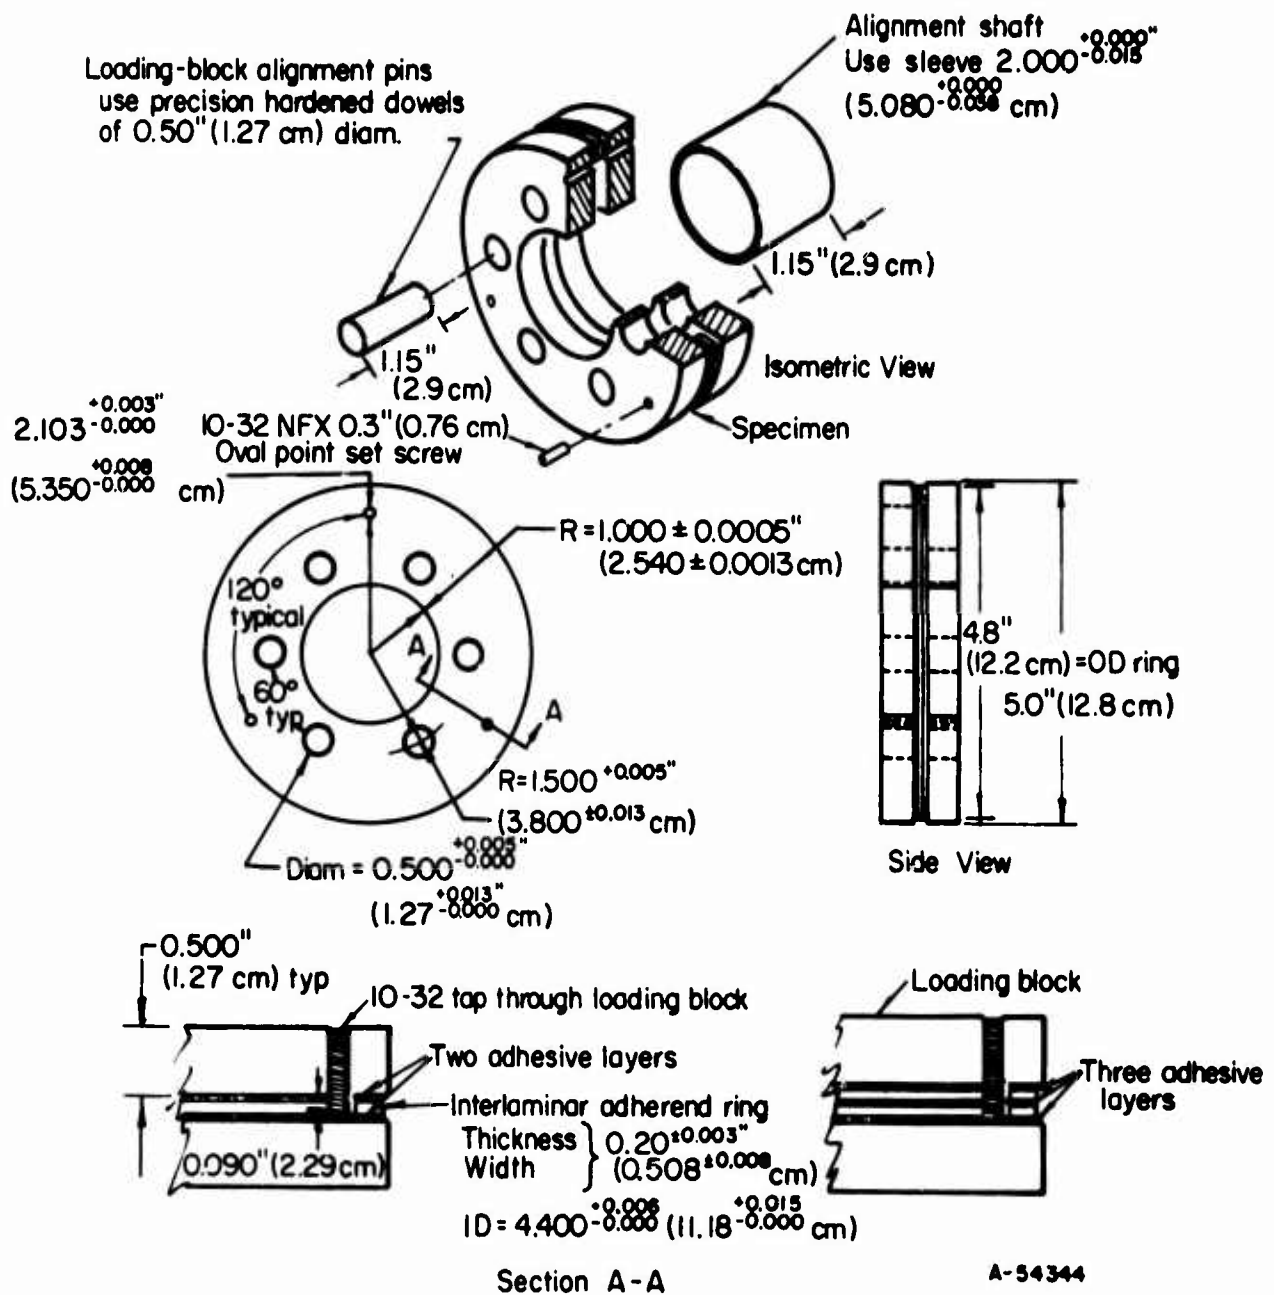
ADHESIVE TORSIONAL SHEAR SPECIMEN AND ALIGNMENT SETUP (REF. 65)
